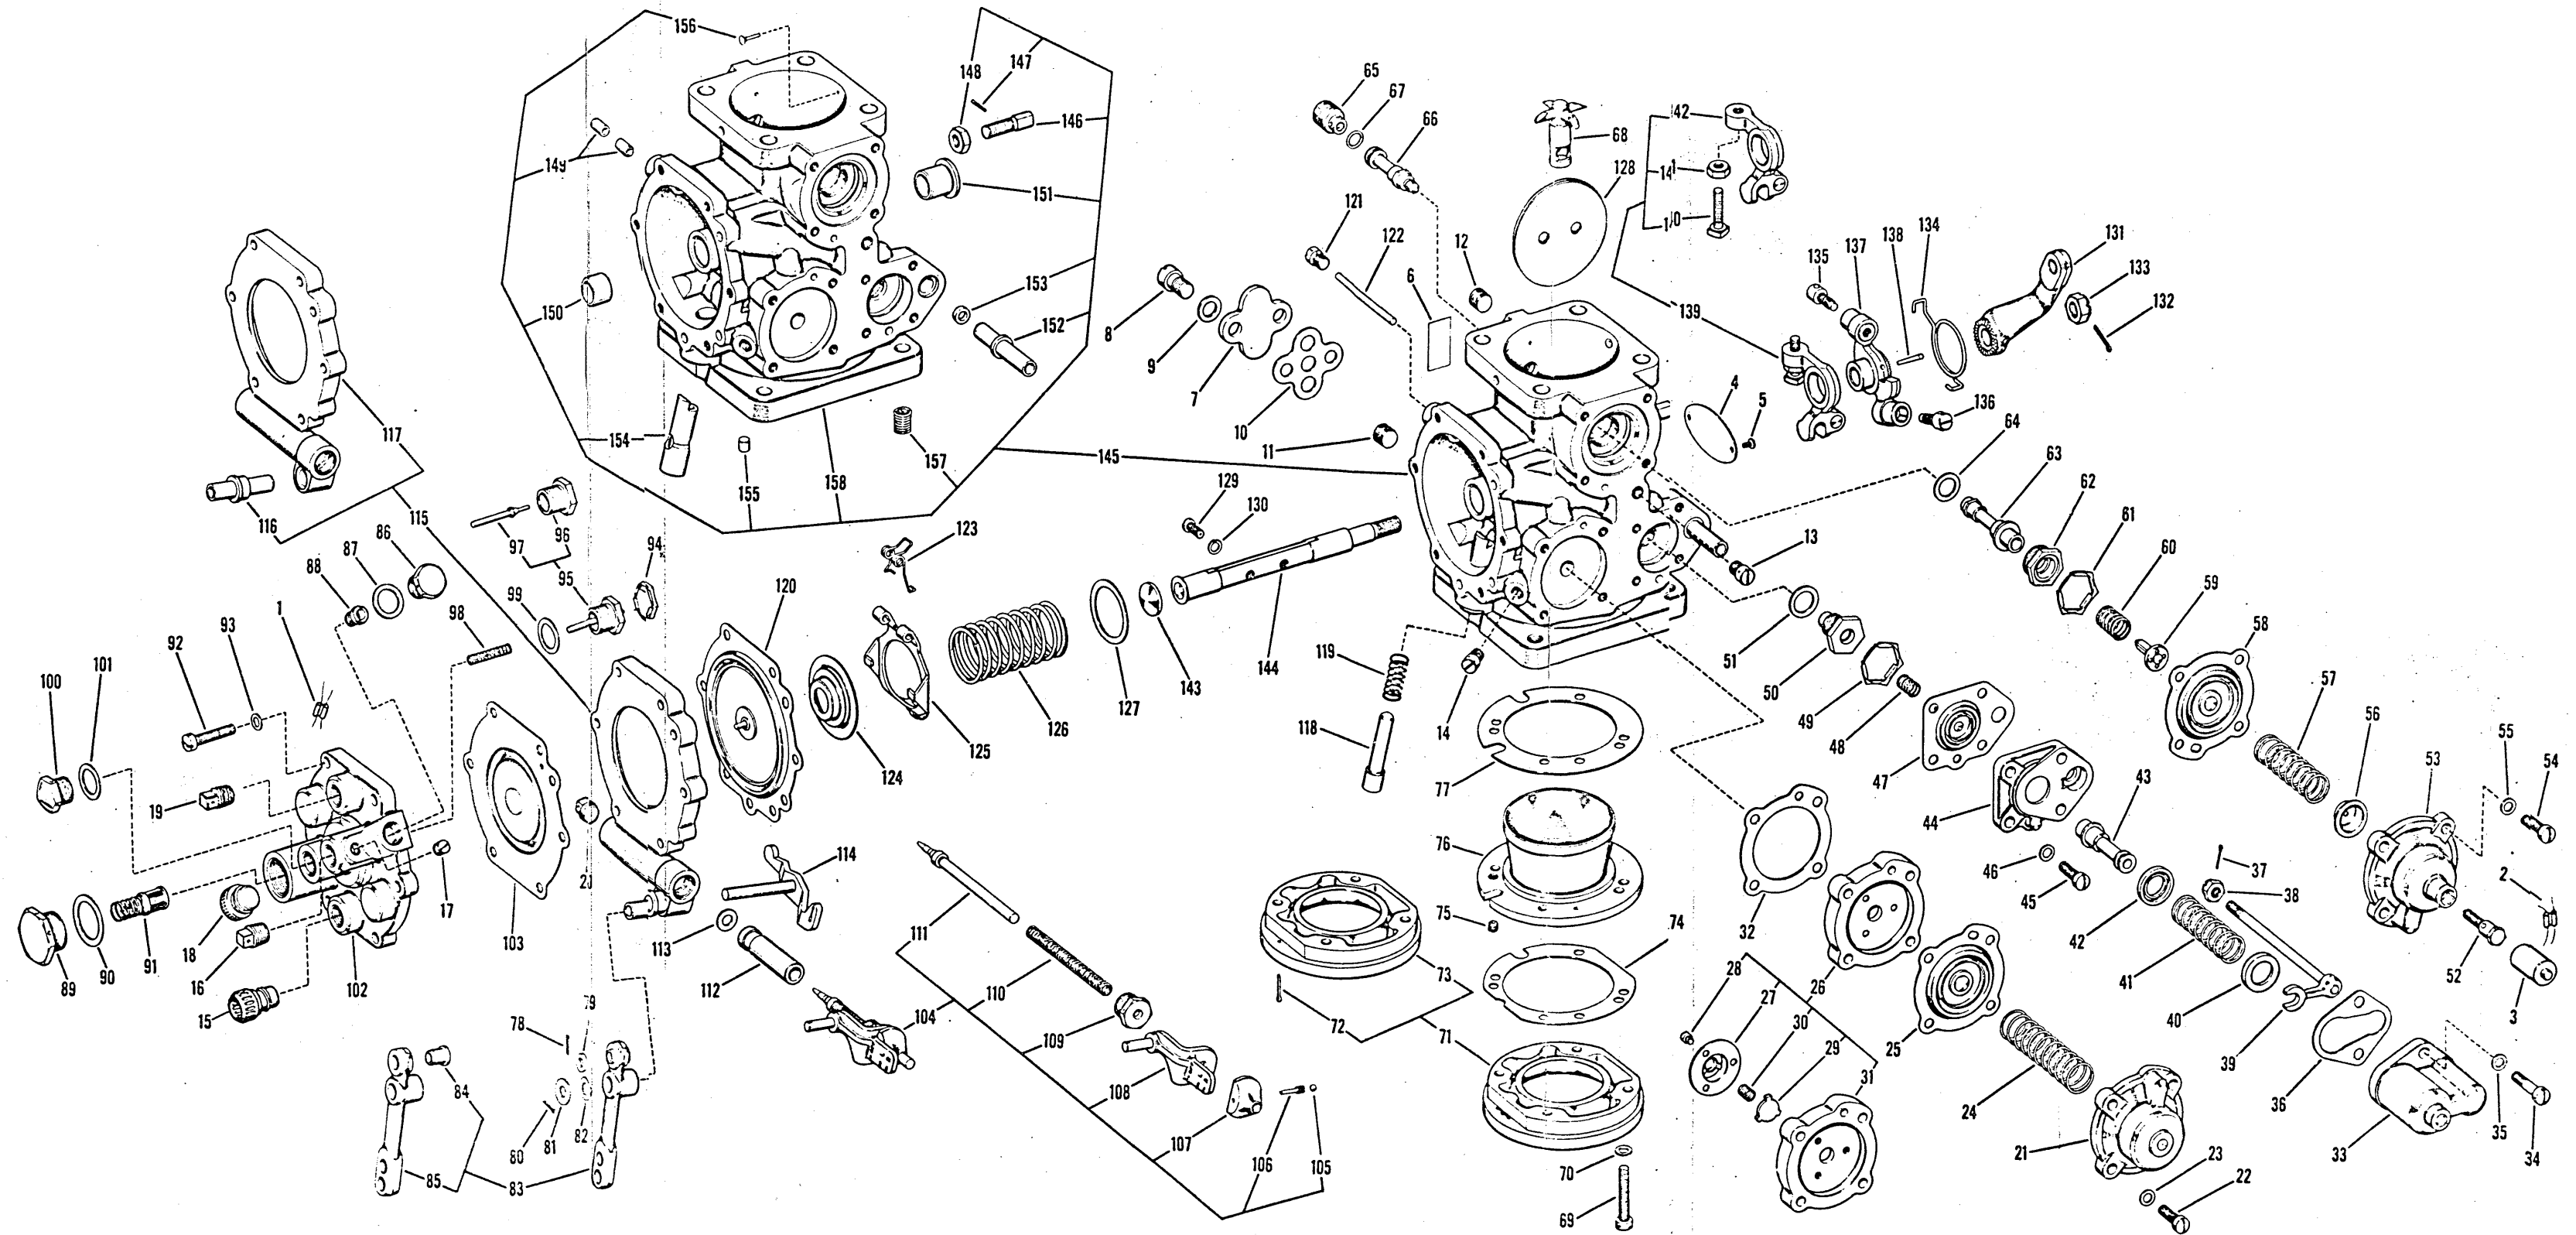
Exploded View of Model PS-5C Injection Carburetor
